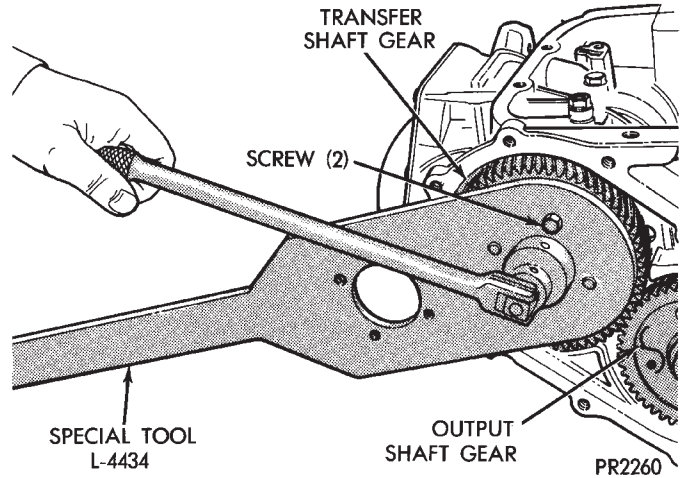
Remove Transfer Shaft Gear Retaining Nut
